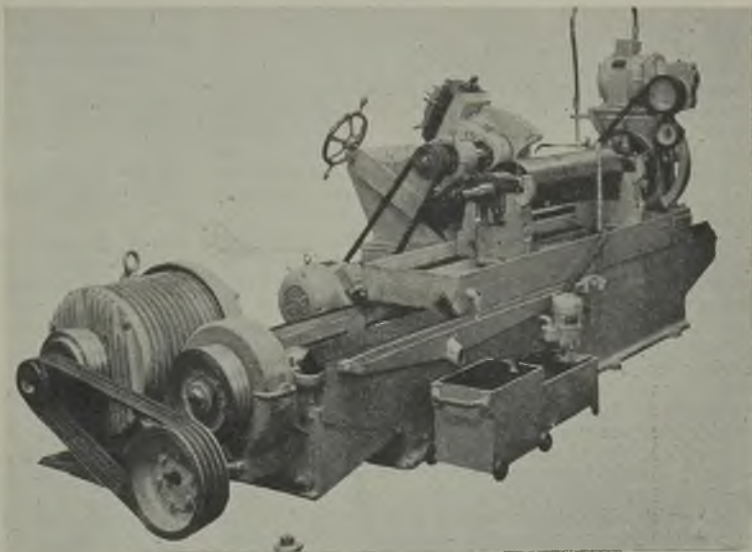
ROLL GRINDING AND FLUTING MACHINE.
